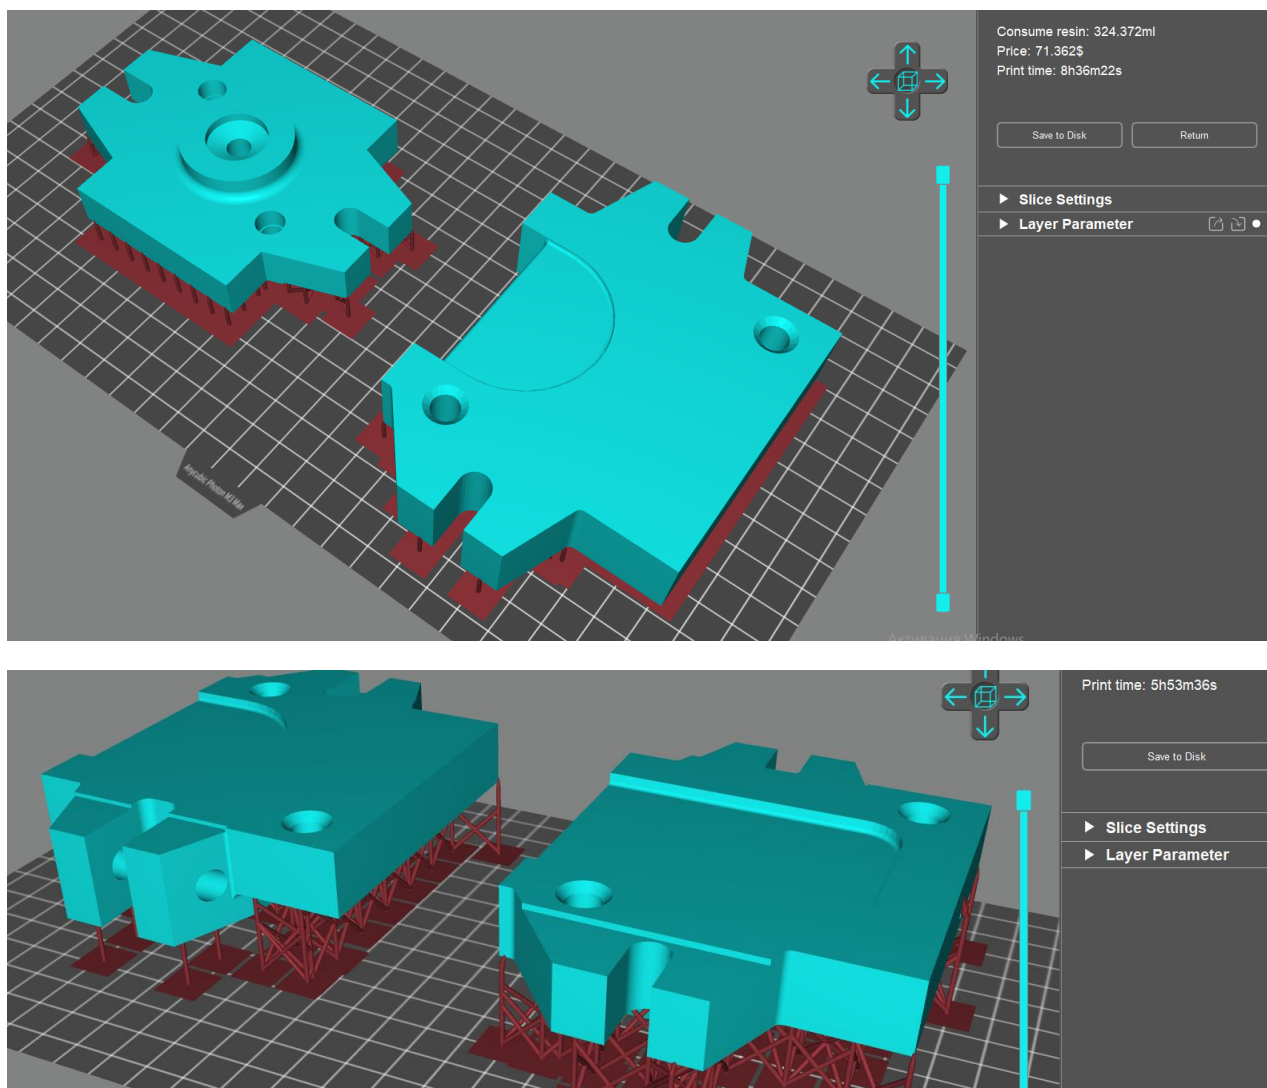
Different layouts for parts on a 3D printer plate (two parts)
